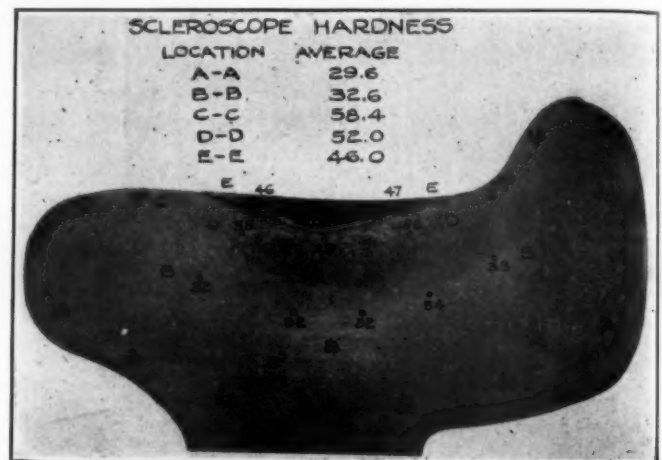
Transverse Section Through a Rim of a Cast Iron Wheel—Flat Spots Were Welded By the Gas Method
